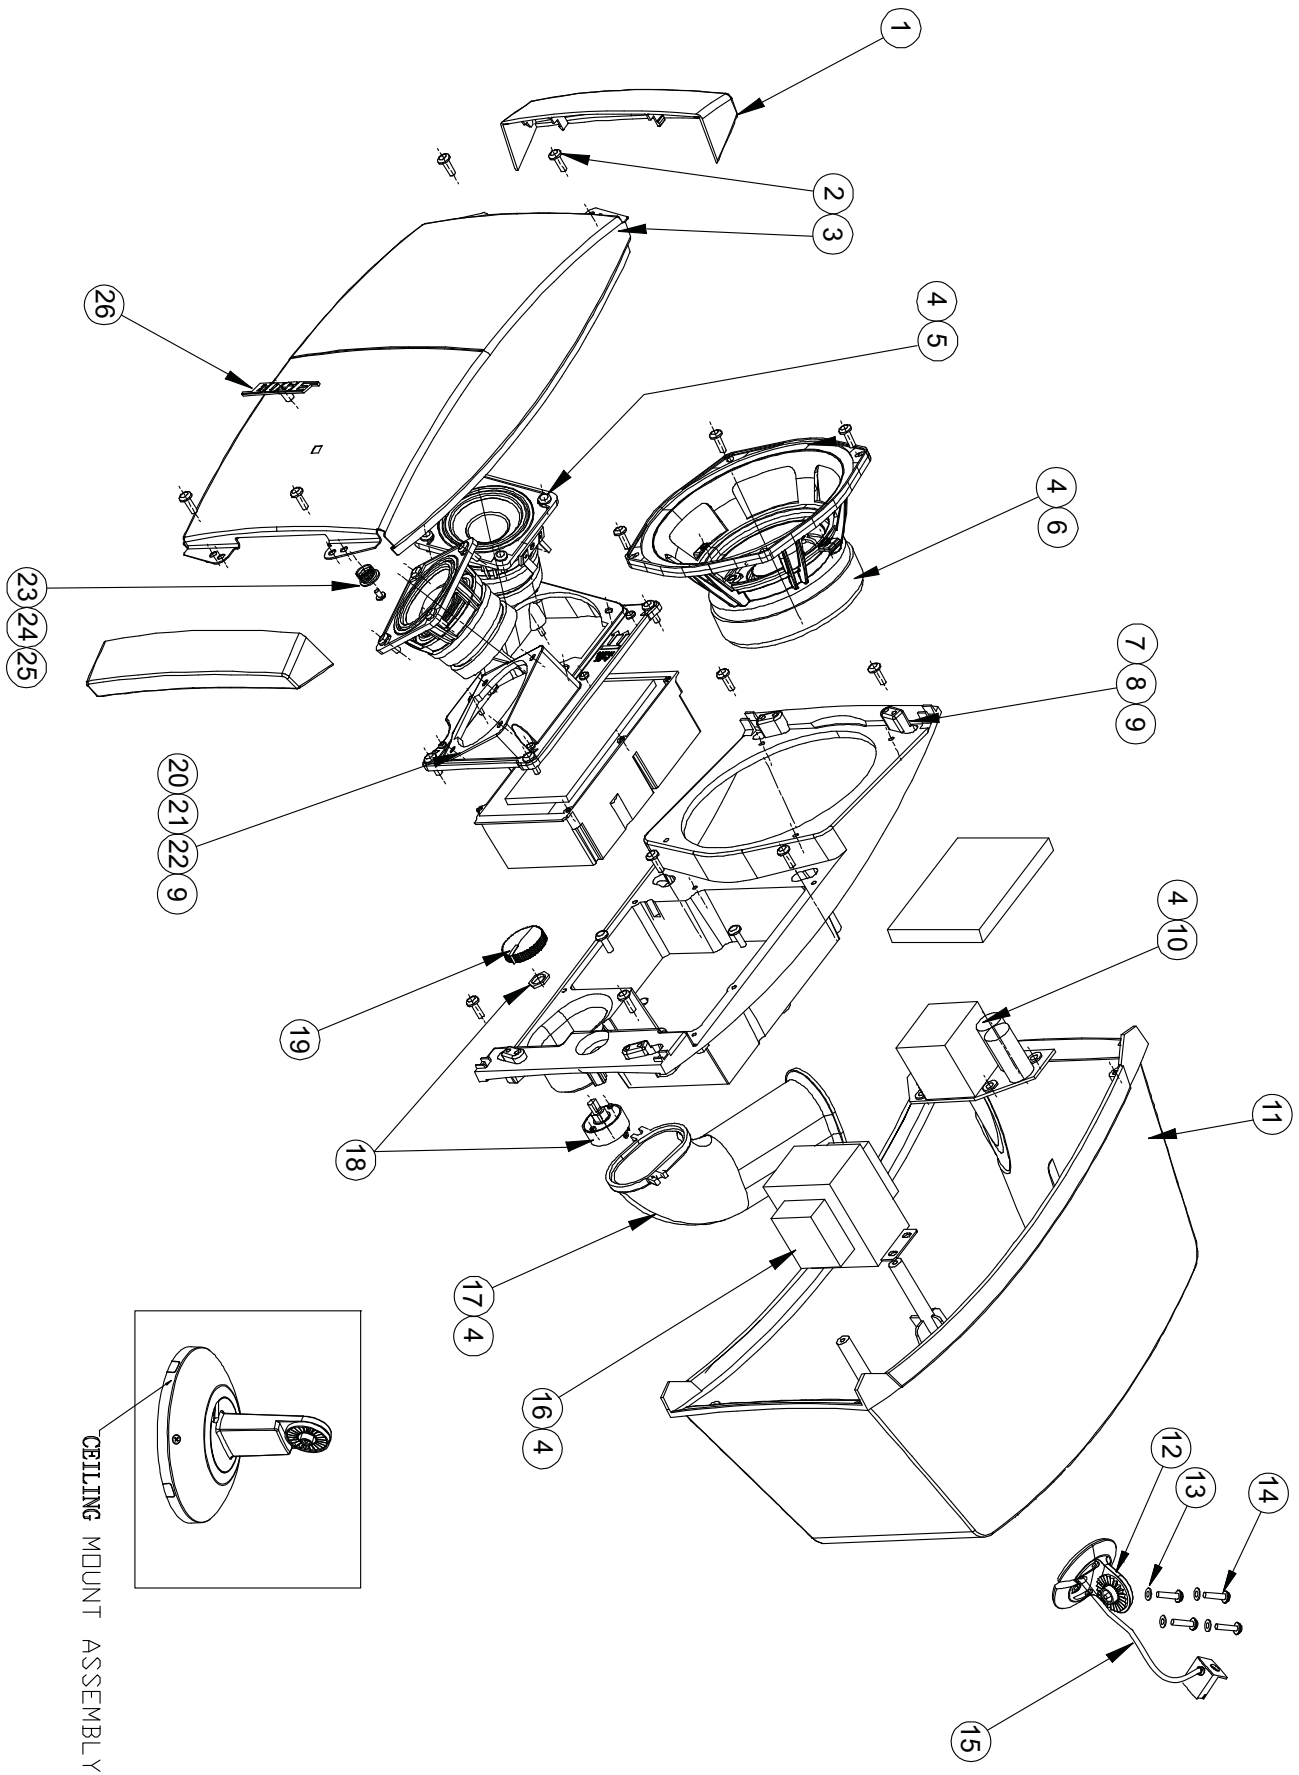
DS100 SE Ceiling-Mount Loudspeaker Exploded View
